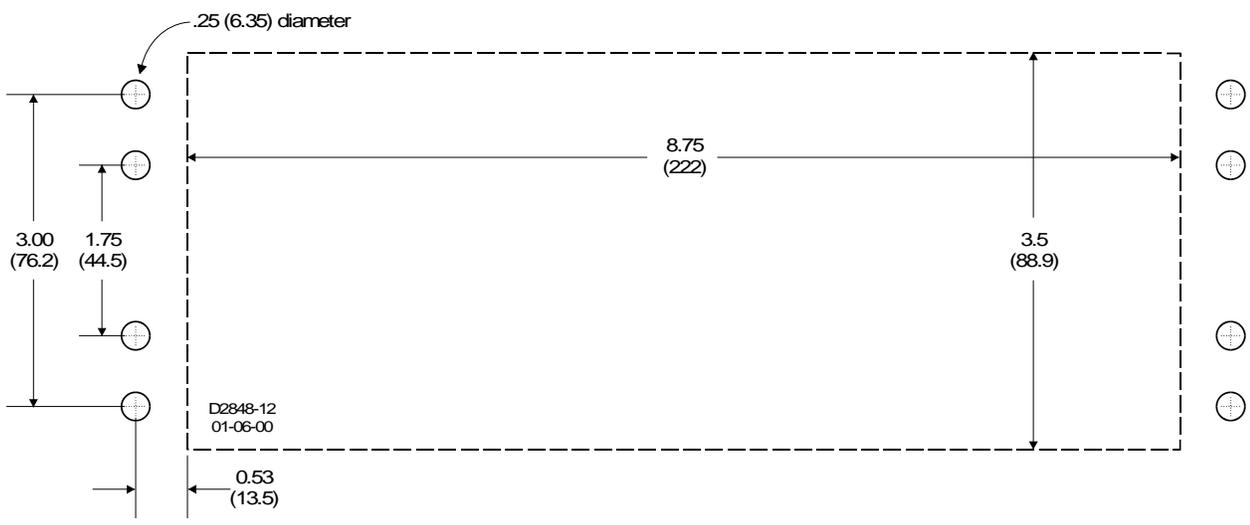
Single H1 Relay Mounting Dimensions for Panel Mounting without an Escutcheon Plate
